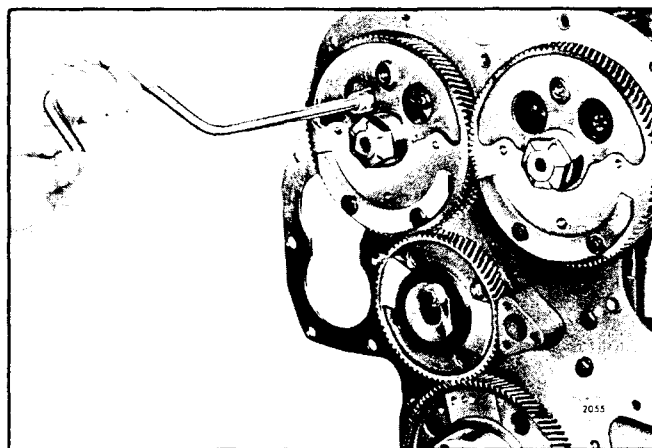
Removing or Installing Thrust Washer Retaining Bolts
